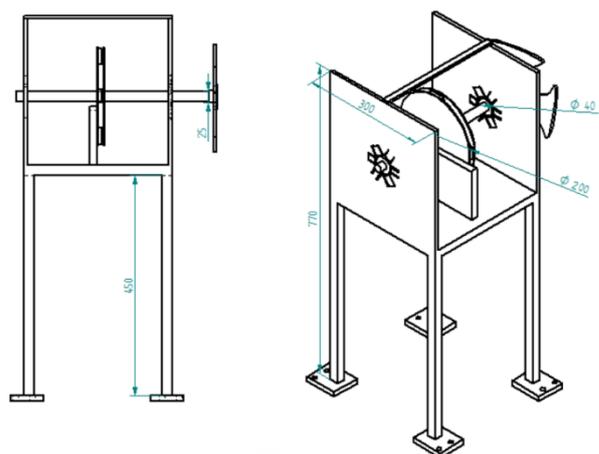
Assembled view of horizontal axis wind turbine with dimensions (in mm)
